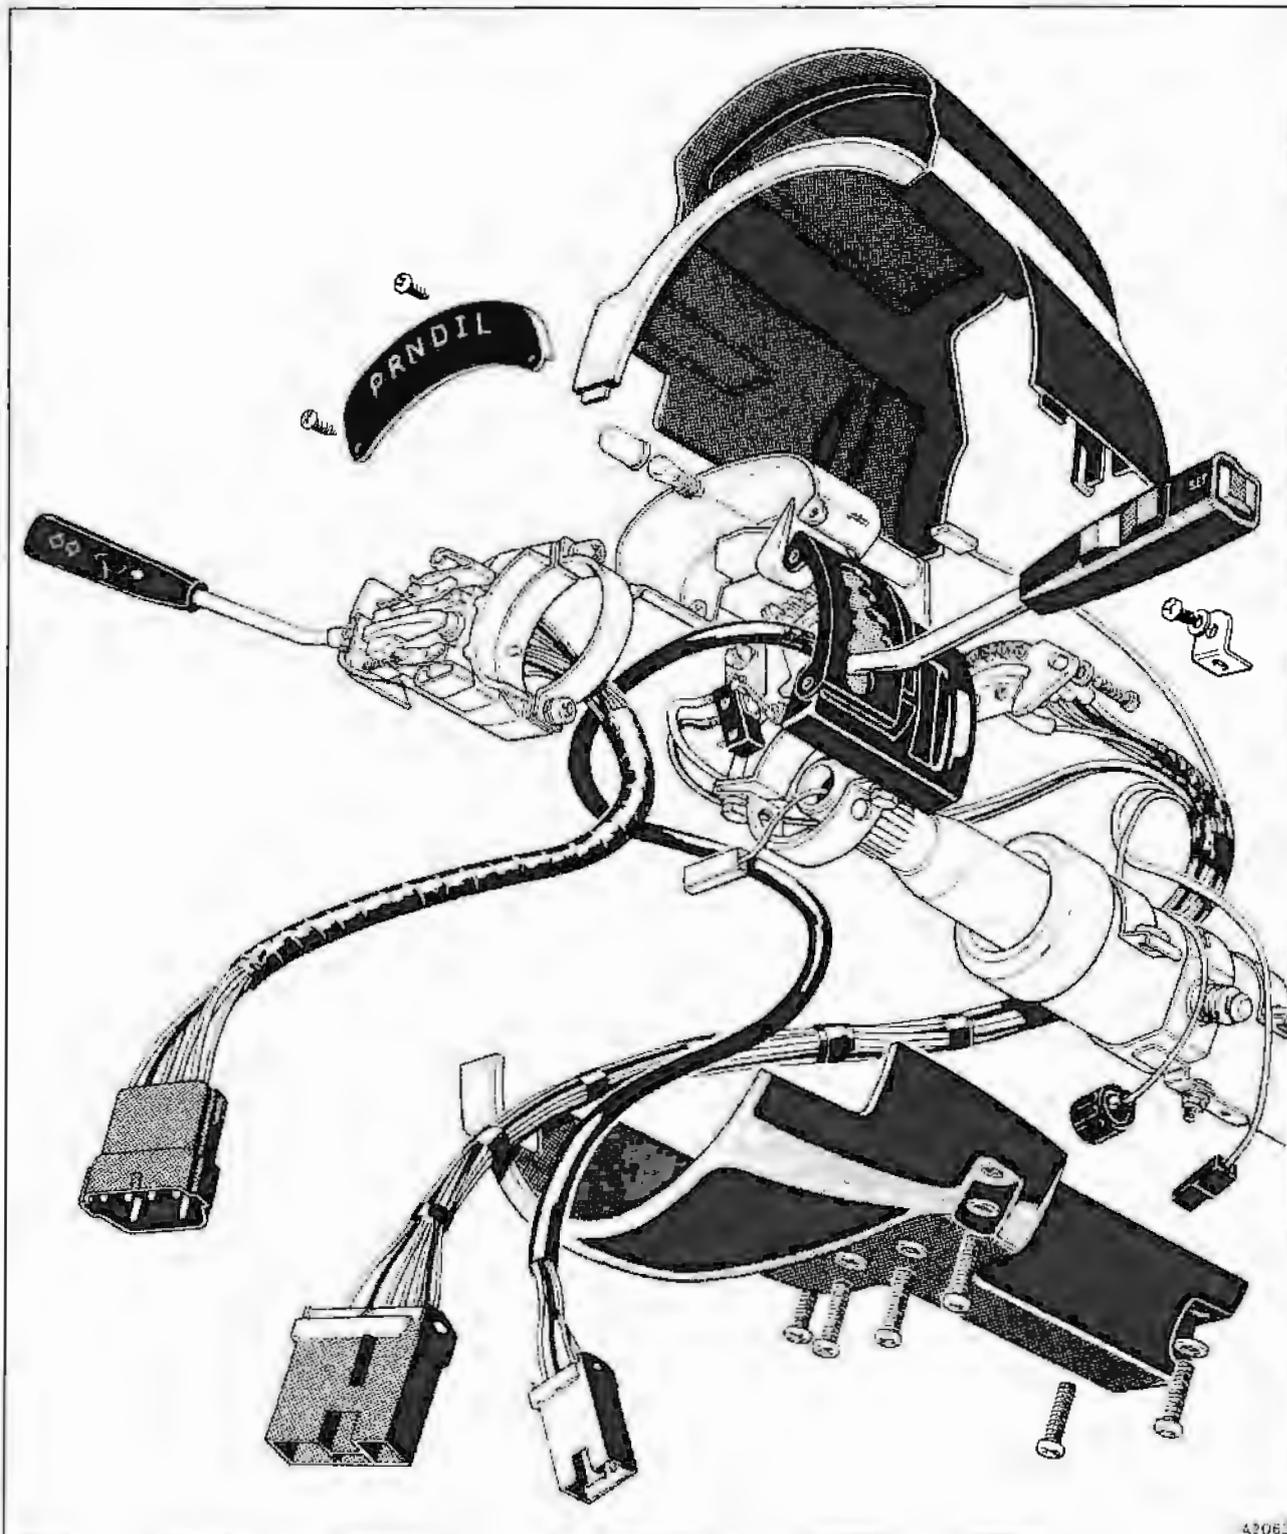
Gear range selector, direction indicator, wash/wipe units, upper and lower cowlings
